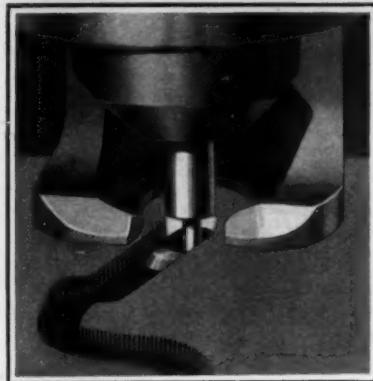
The rear face of the rear crankcase section is machined on a "Mil-Wauke-Mil."
